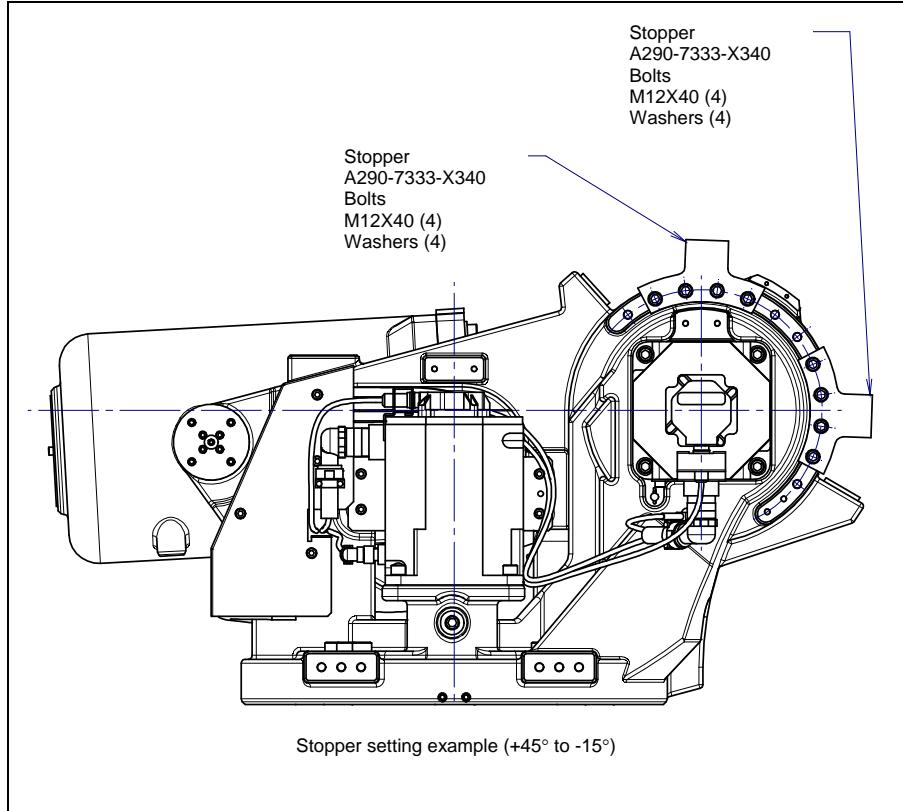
(i) Mounting the J2-axis adjustable mechanical stopper (1/2)
